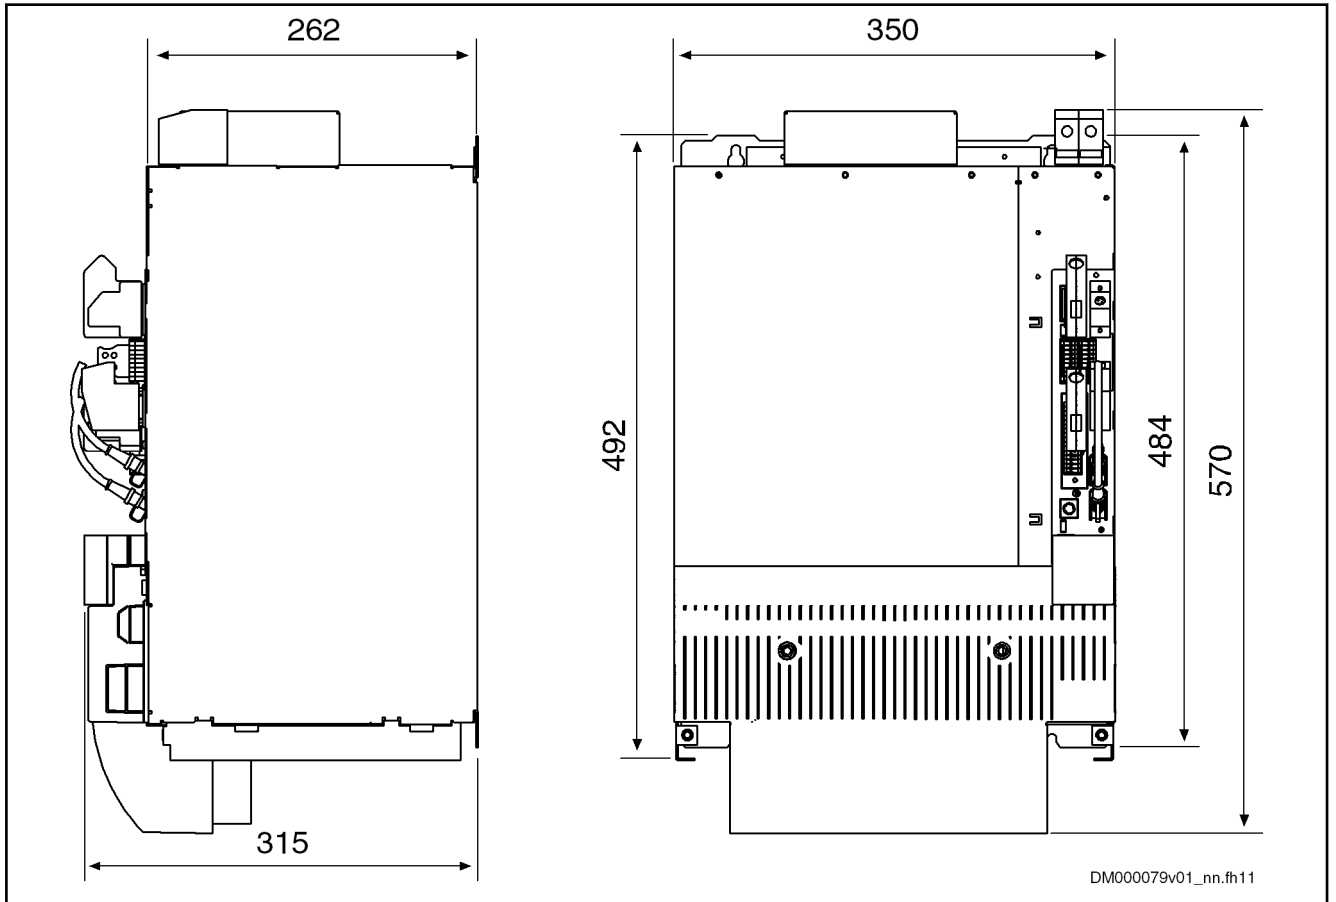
Dimensional drawing HCS03.1E-W0210
